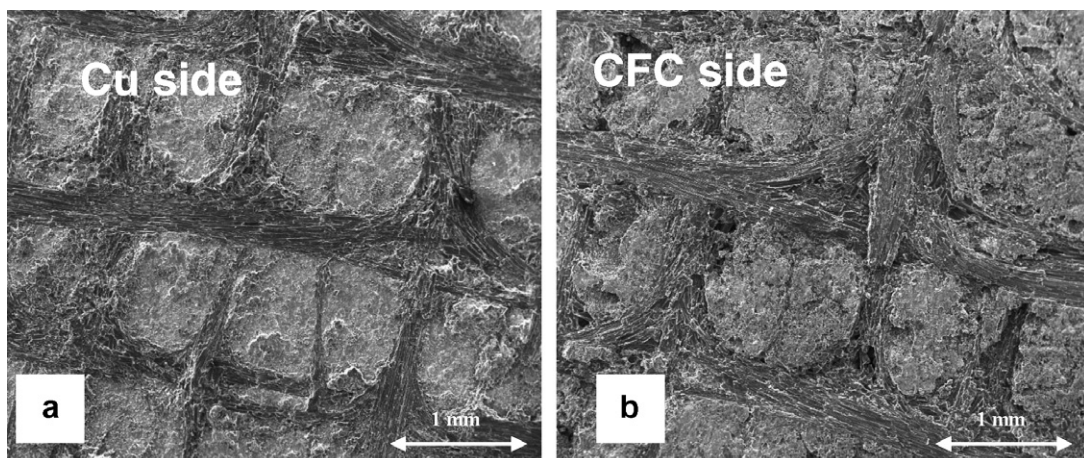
Typical joint structure fracture surfaces: (a) Cu side and (b) CFC side.
